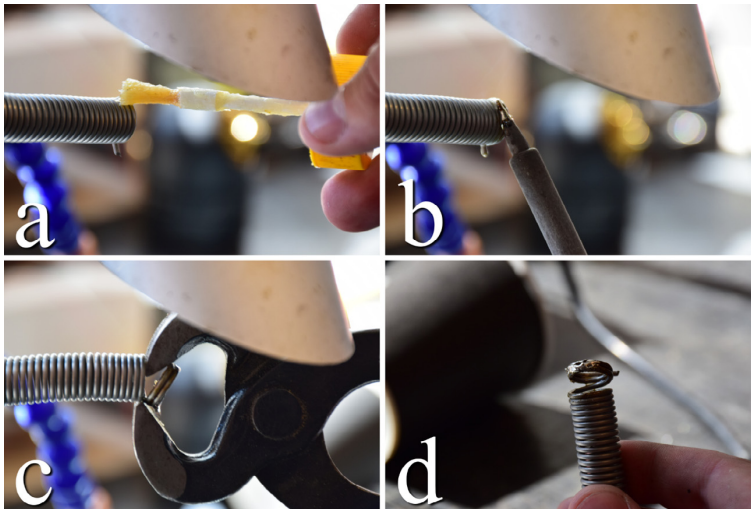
a) Apply flux. b) Solder the top two coils. c) Use pliers to pinch out the connector hoop. d) Finished connection point.
